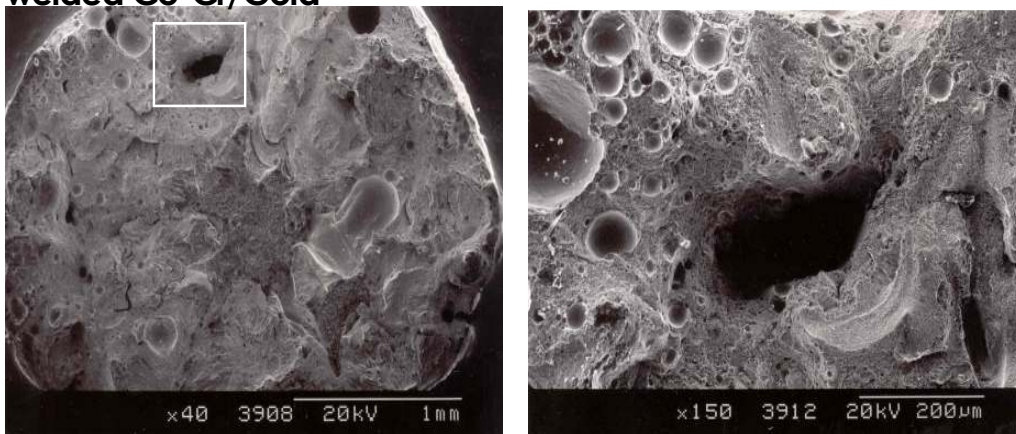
Left, low magnification SEM fractography of laser welded Co-Cr/Gold specimen. Lack of fusion at the center of the specimen together with some porosity. Right, Features of dimple fracture and some porosity are present.
